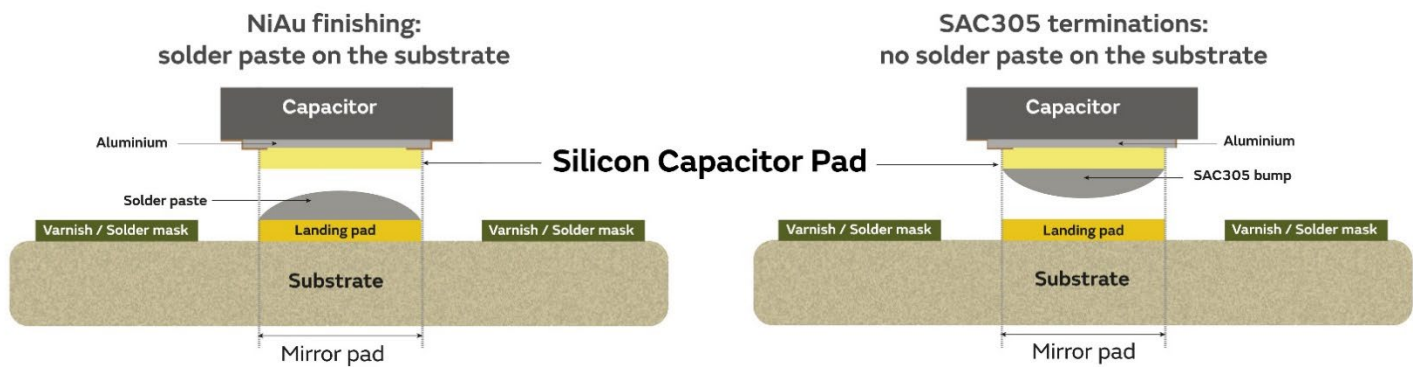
Simplified view of NSMD assembly from the side (only one pad is shown here)
